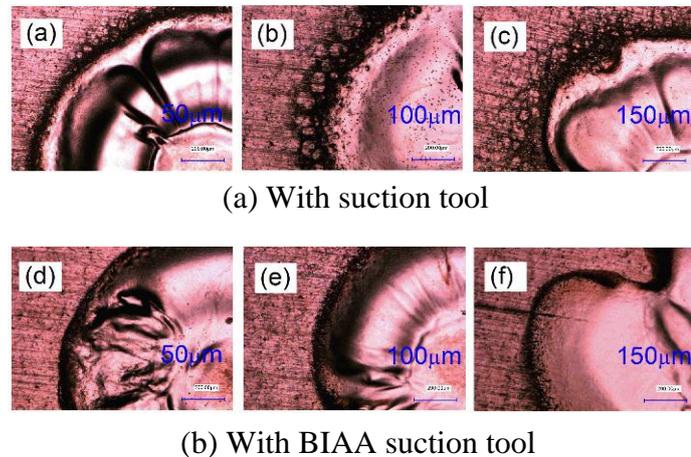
Stray corrosion on the edge of the machined hole
